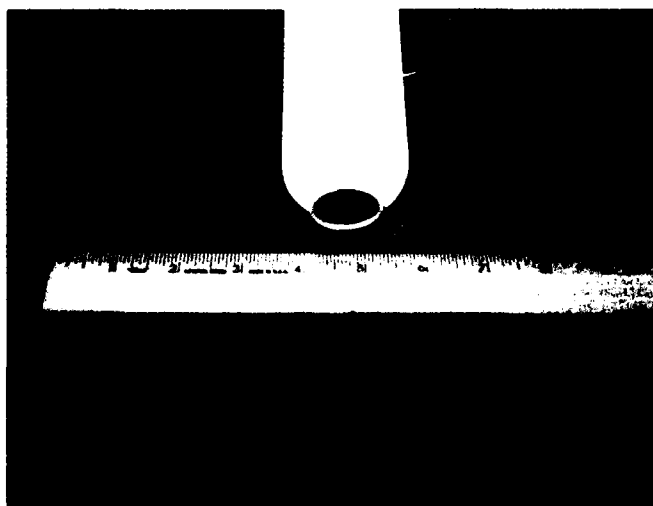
End view of aerosol can showing rolled edge and crimping shoulder in opening.
